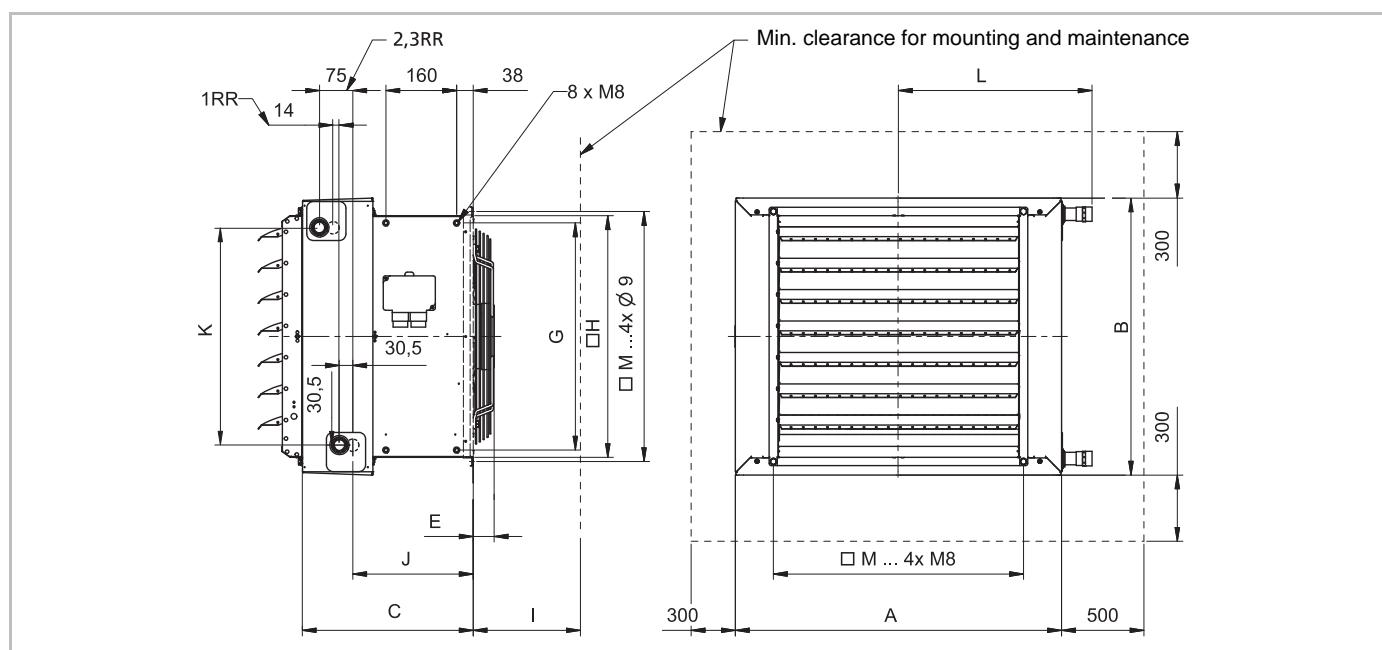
Dimension of unit heater and arrangement of heat exchanger connection fitting
